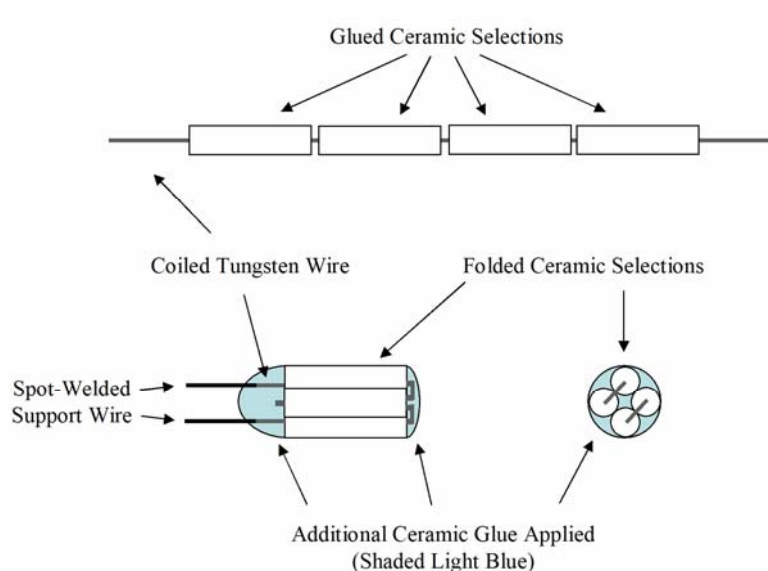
Schematic Assembly Drawings of the Sample Heater
